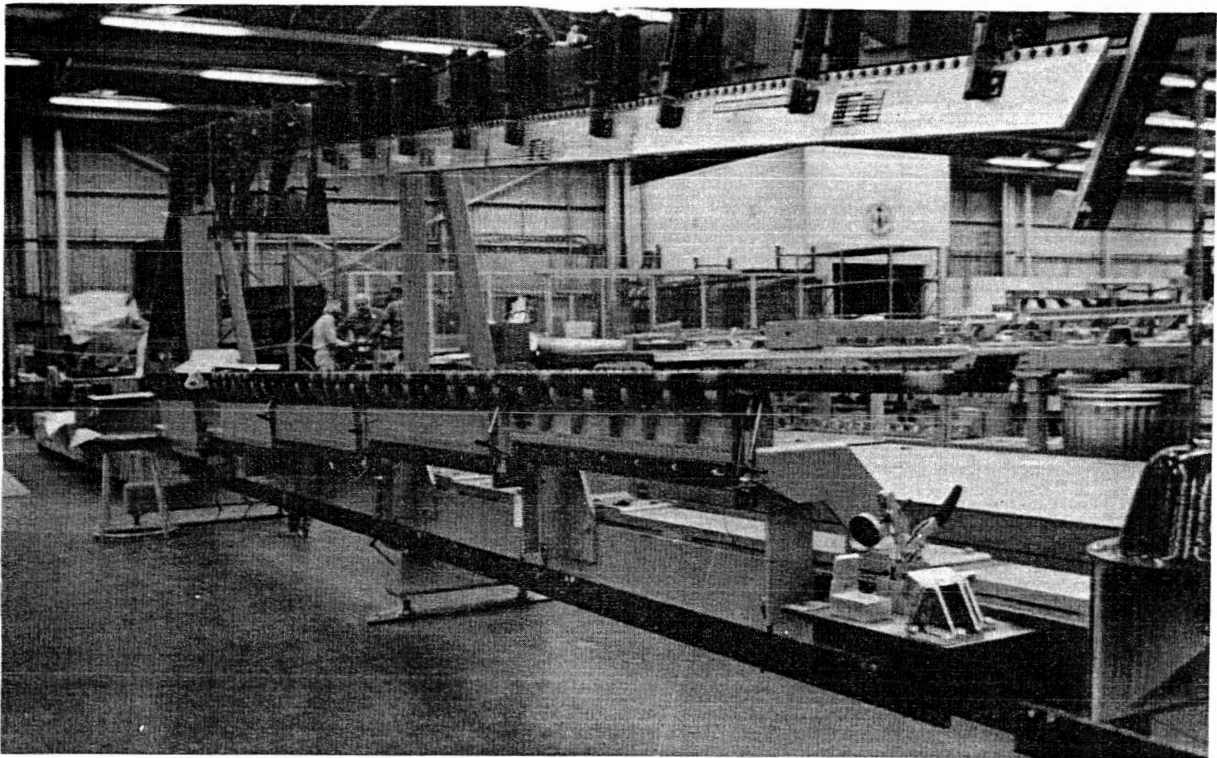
Front-Spar/Leading-Edge Assembly Located in Major Jig
